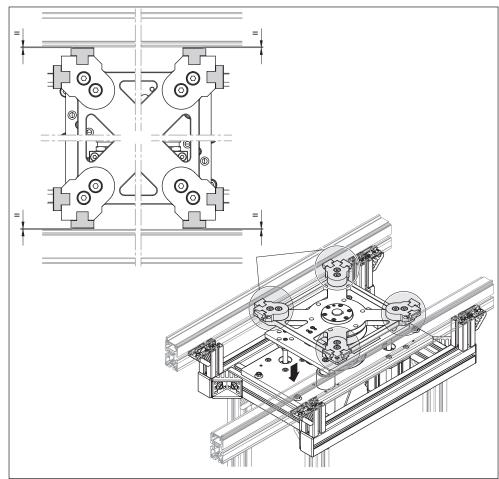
Checking and adjusting the rotation angle (here size 2 180° for WT 2, WT 2/F)
